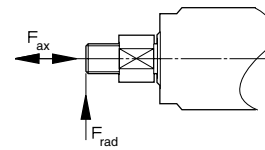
Load on output shaft for basic motor with threaded shaft.
